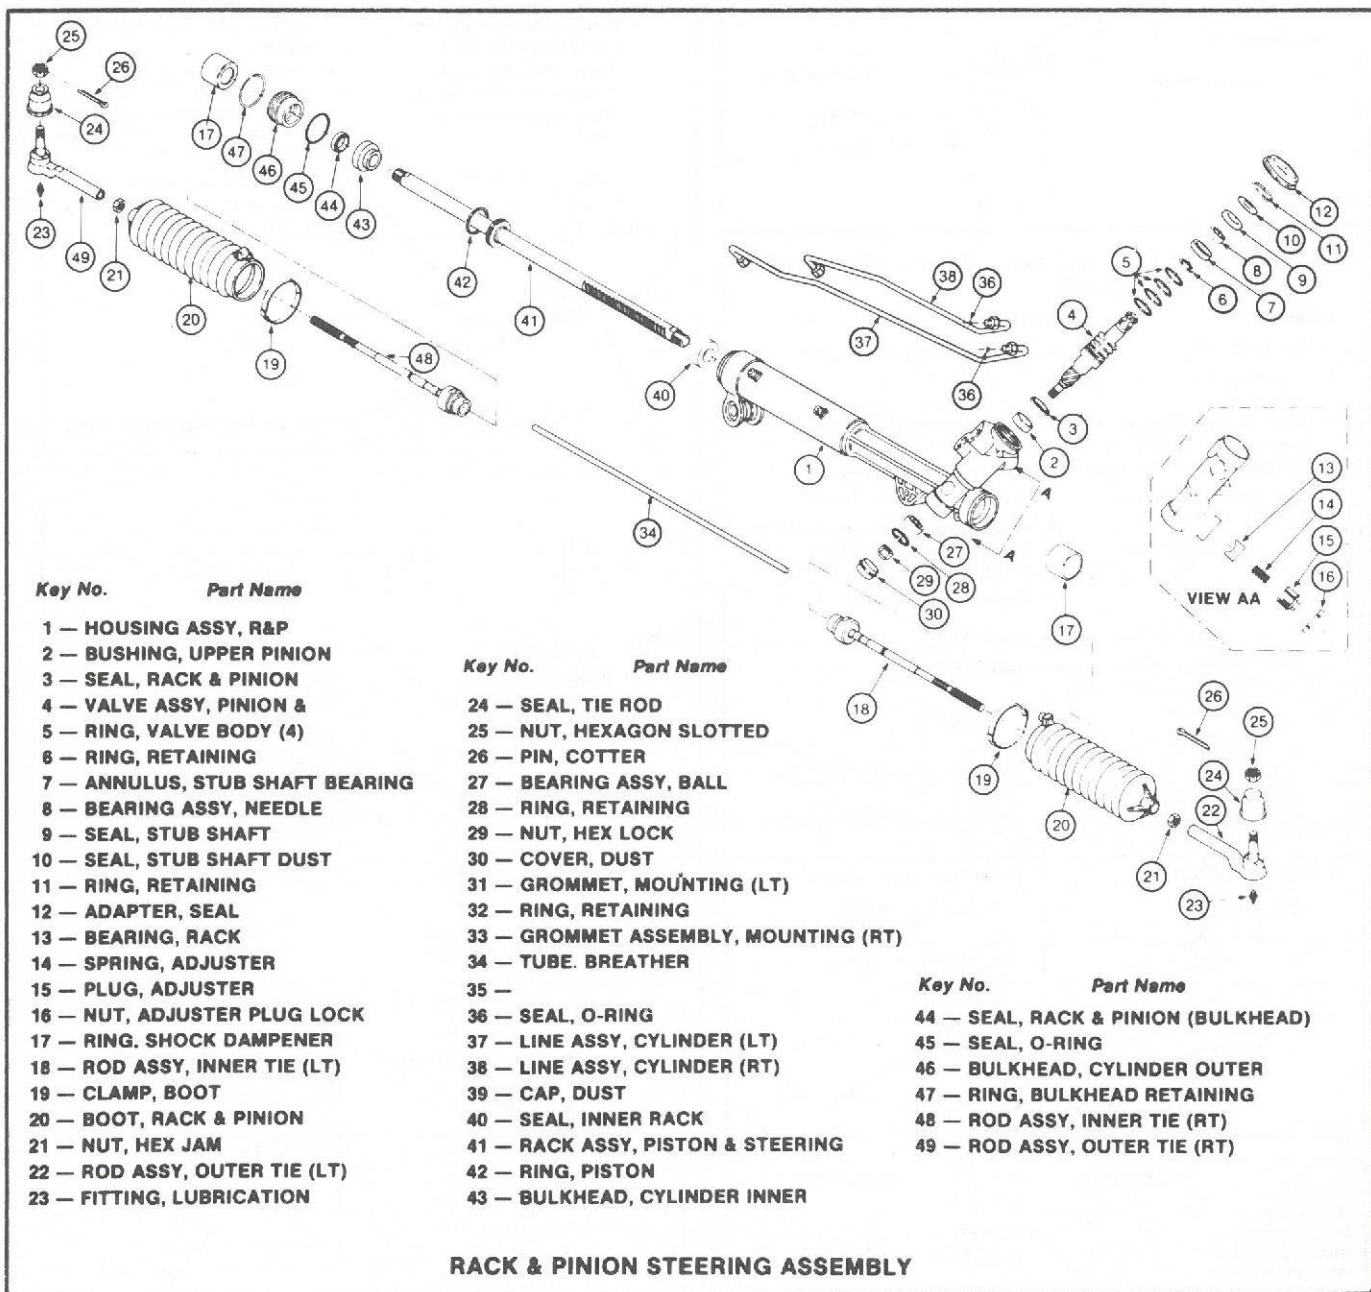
Power Rack and Pinion Steering Assembly - Replaces Page 3B2-9
